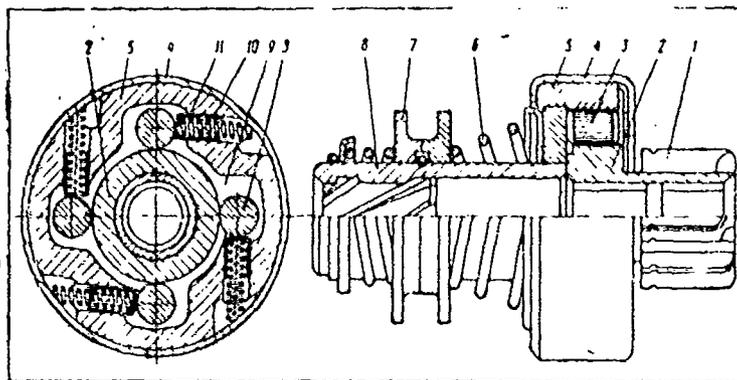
Drive of ST130 Starter: 1, drive gear, 2, gear hub, 3, roller, 4, clutch cover, 5, free travel clutch, 6, spring, 7, dog clutch, 8, blind bushing, 9, wedged groove in clamp, 10, pusher spring, 11, pusher.
